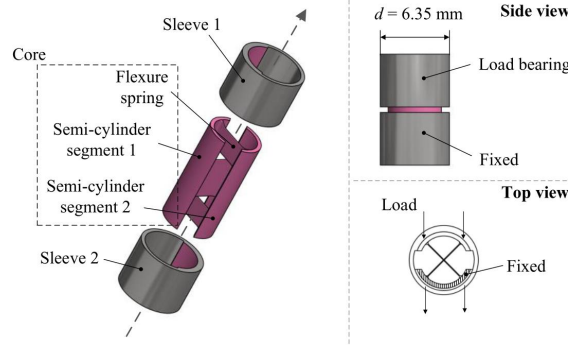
Exploded CAD model of the flexure bearing (C-Flex pivot bearing, D-10) [215] with its main parameters. Adopted from [22].
